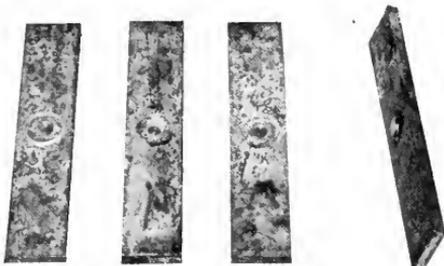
Sample Plates with Holes Plugged by Spot-welding. At the right is shown a plate with plug in place previous to welding
